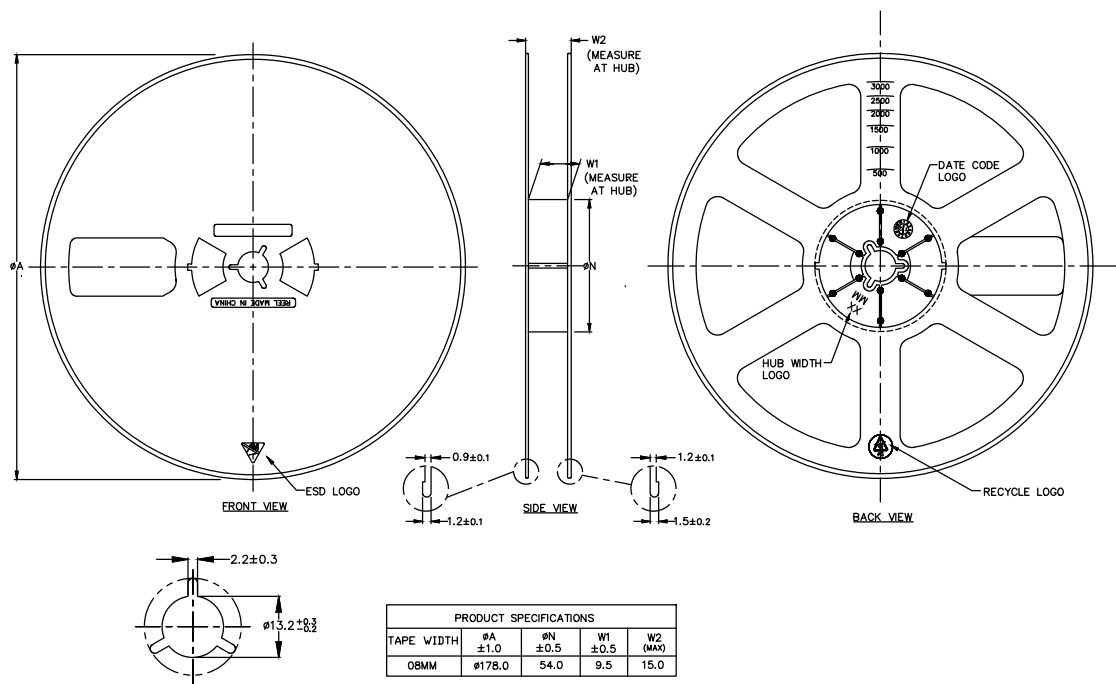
Drawing of reel (first-angle projection) with diameter of 180 mm
